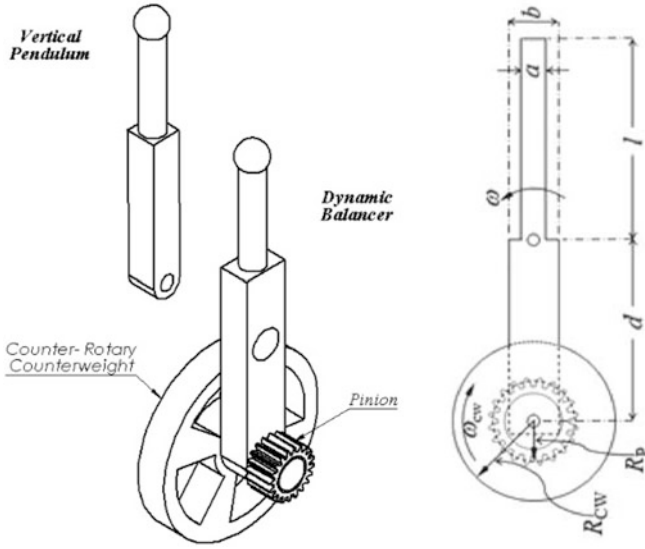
A design for the dynamic balancer: (a) Mechanical design layout. (b) Design parameters
